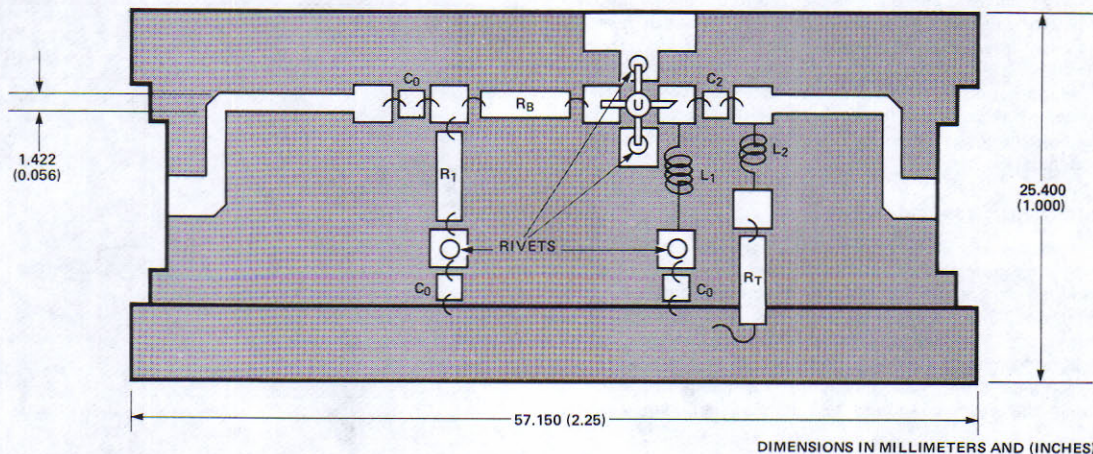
Circuit Board Layout and Component Placement (Top View).
